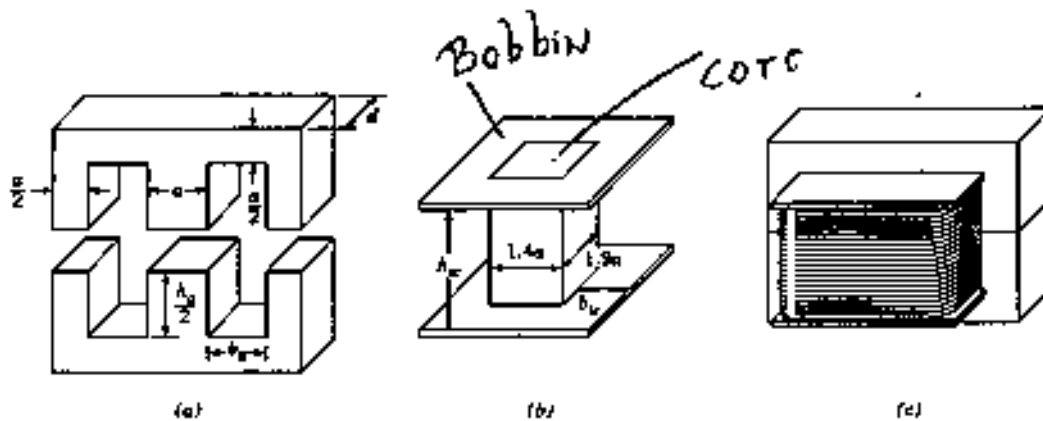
Dimensioned diagram of (a) a double-E core (b) bobbin, and (c) assembled core with winding.
